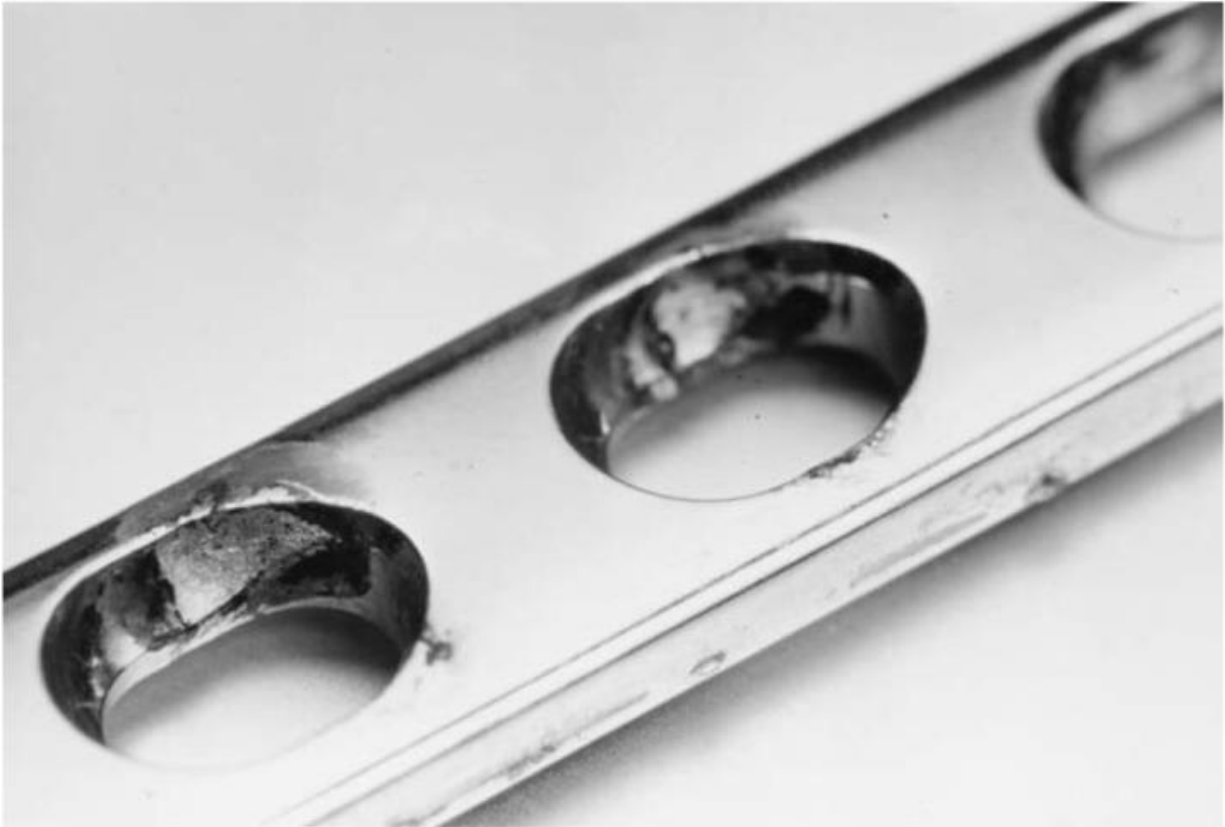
Crevice corrosion in a screw hole in fracture fixation plate.
